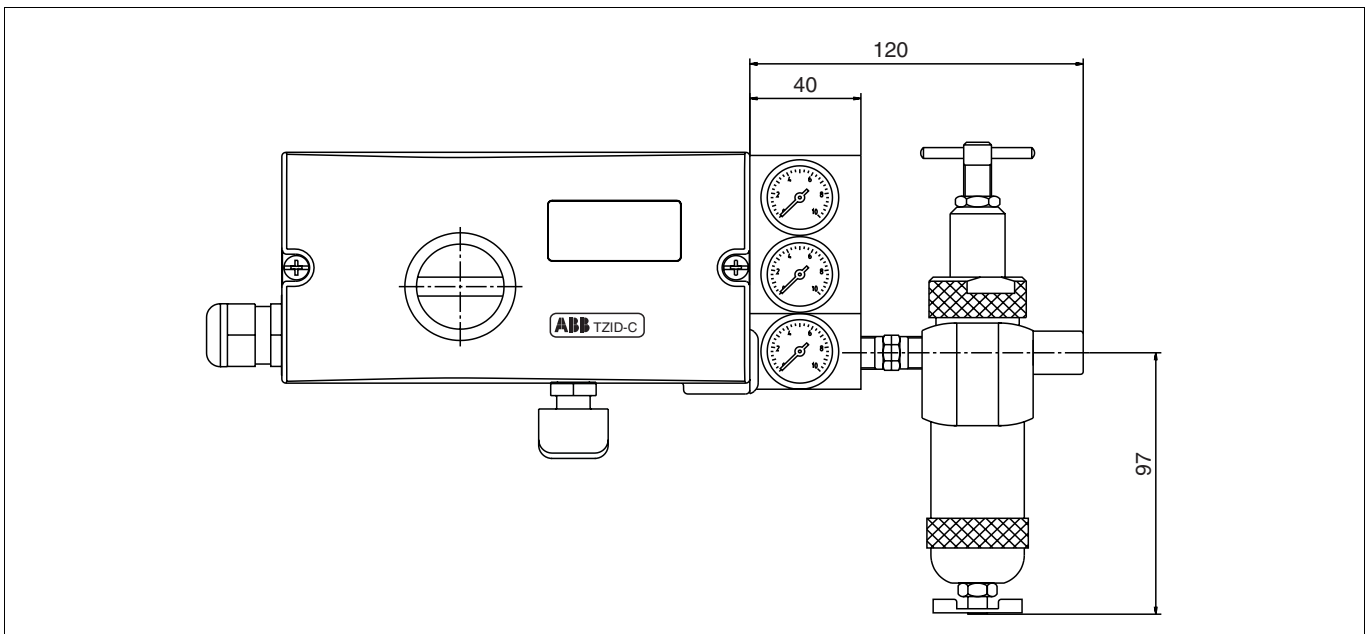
Positioner TZIDC-120 with pressure gauge block and filter regulator
